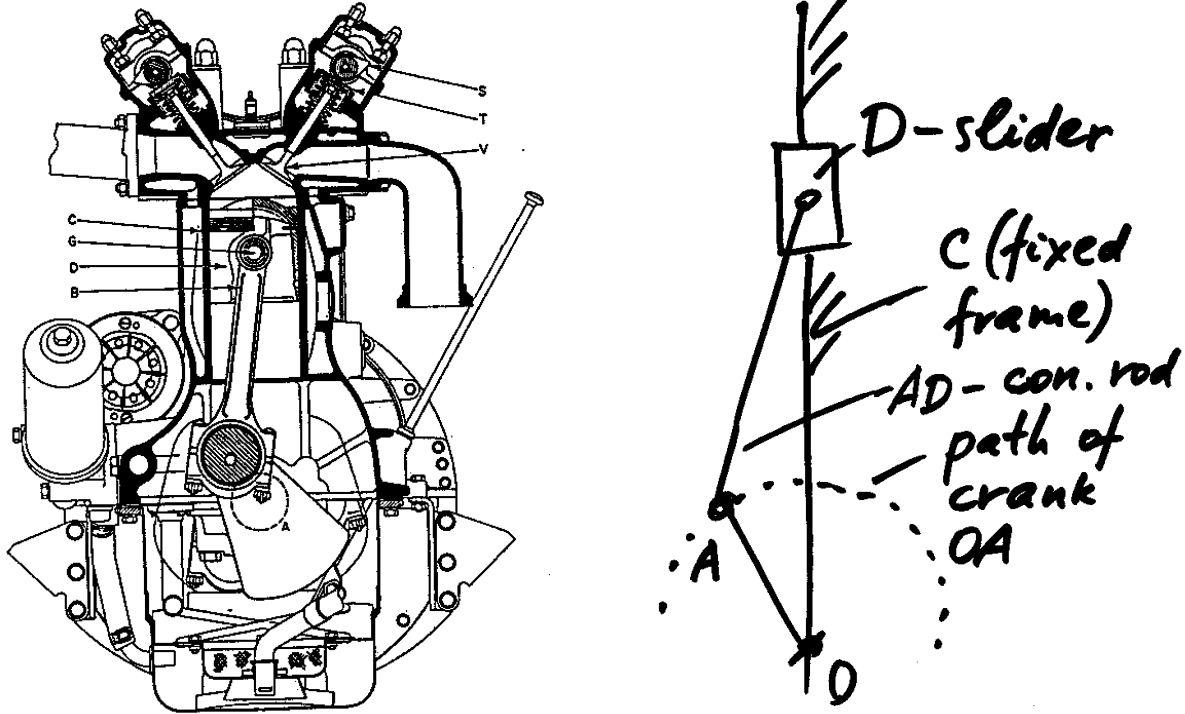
Cross-section through a Jaguar 3.8-litre six-cylinder engine (after Morrison and Crossland, 'Mechanics of Machines', Longman), and the schematic mechanism.
